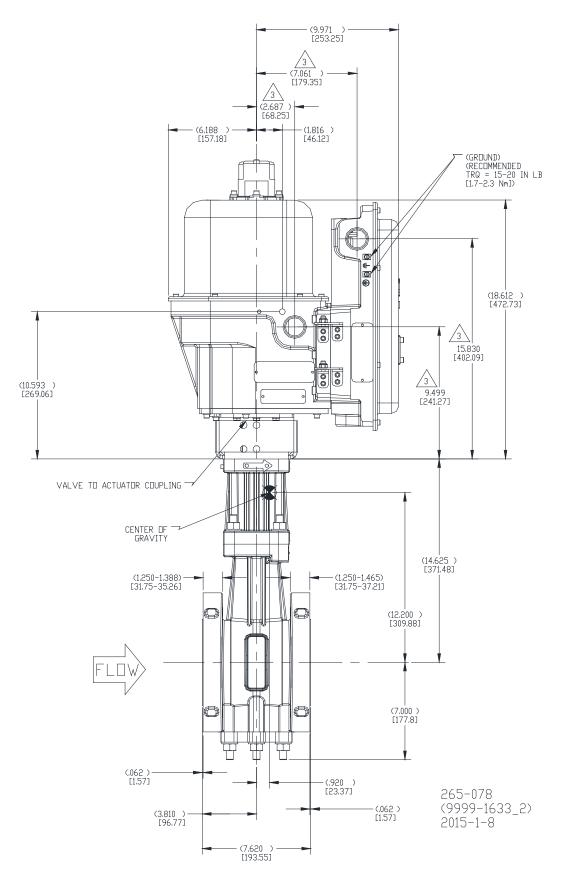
RVP-200 Outline Drawing (90-degree Clockwise Configuration)
